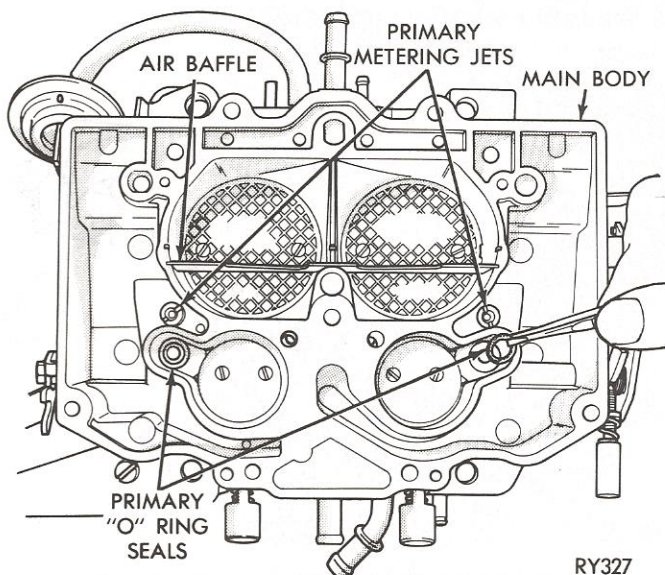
Removing or Installing Primary "O" Rings and Metering Jets
